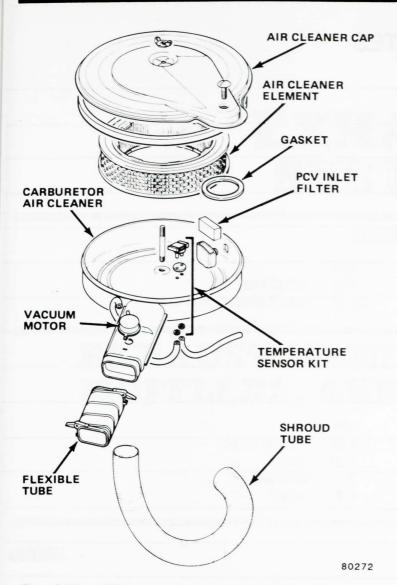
J-131 TAC System—Six-Cylinder (Eight-Cylinder Similar)
